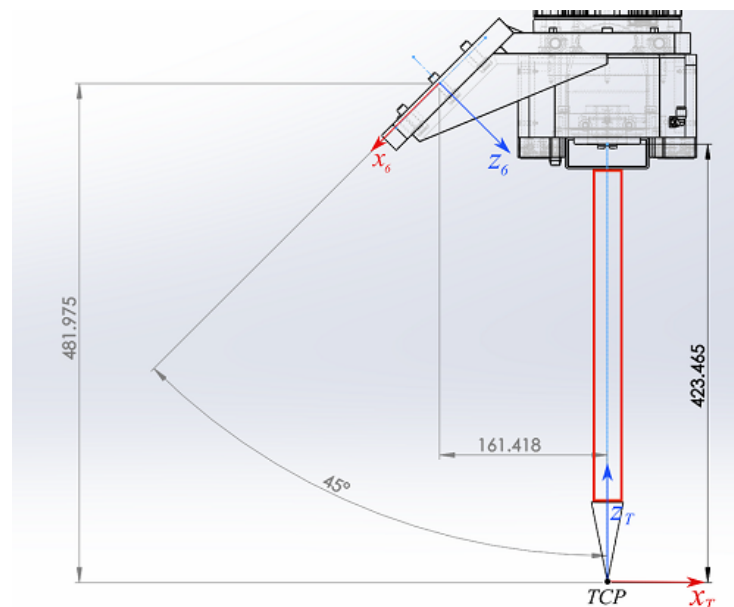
Dimensions of the cutting knife placement and orientation with respect to the robot flange frame
